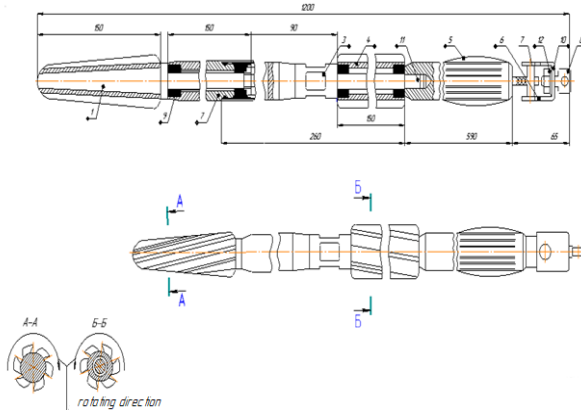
Design of the cleaning device SKF-03 model: 1 - cantilever mill; 2 - bearing housing; 3 - link; 4 - back cutter; 5 - control rod; 6 - strap; 7 - axis; 8 - rotor seal; 9 - sliding bearing; 10 - plain washer; 11 - locking pin; 12 - screw
